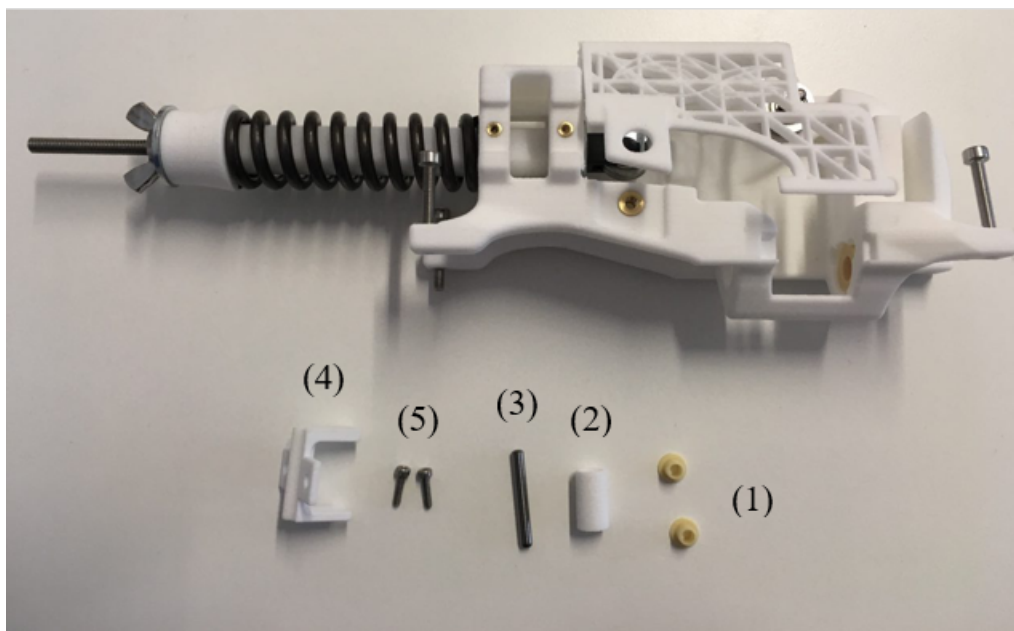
Assemble the cross guide of the displacement shaft.
